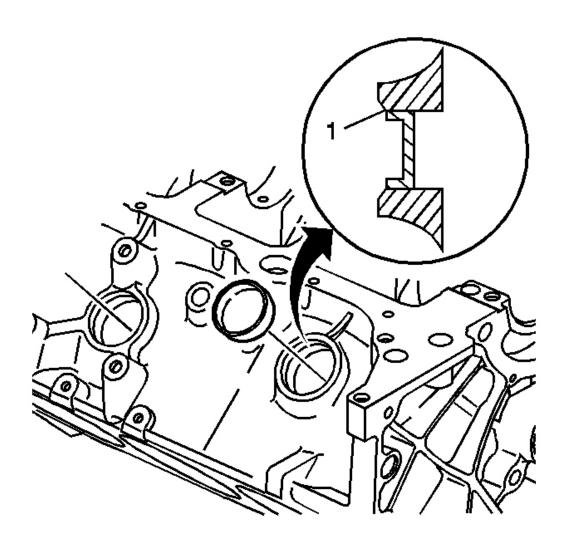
Engine Block Core Hole Chamfer Courtesy of GENERAL MOTORS CORP.
